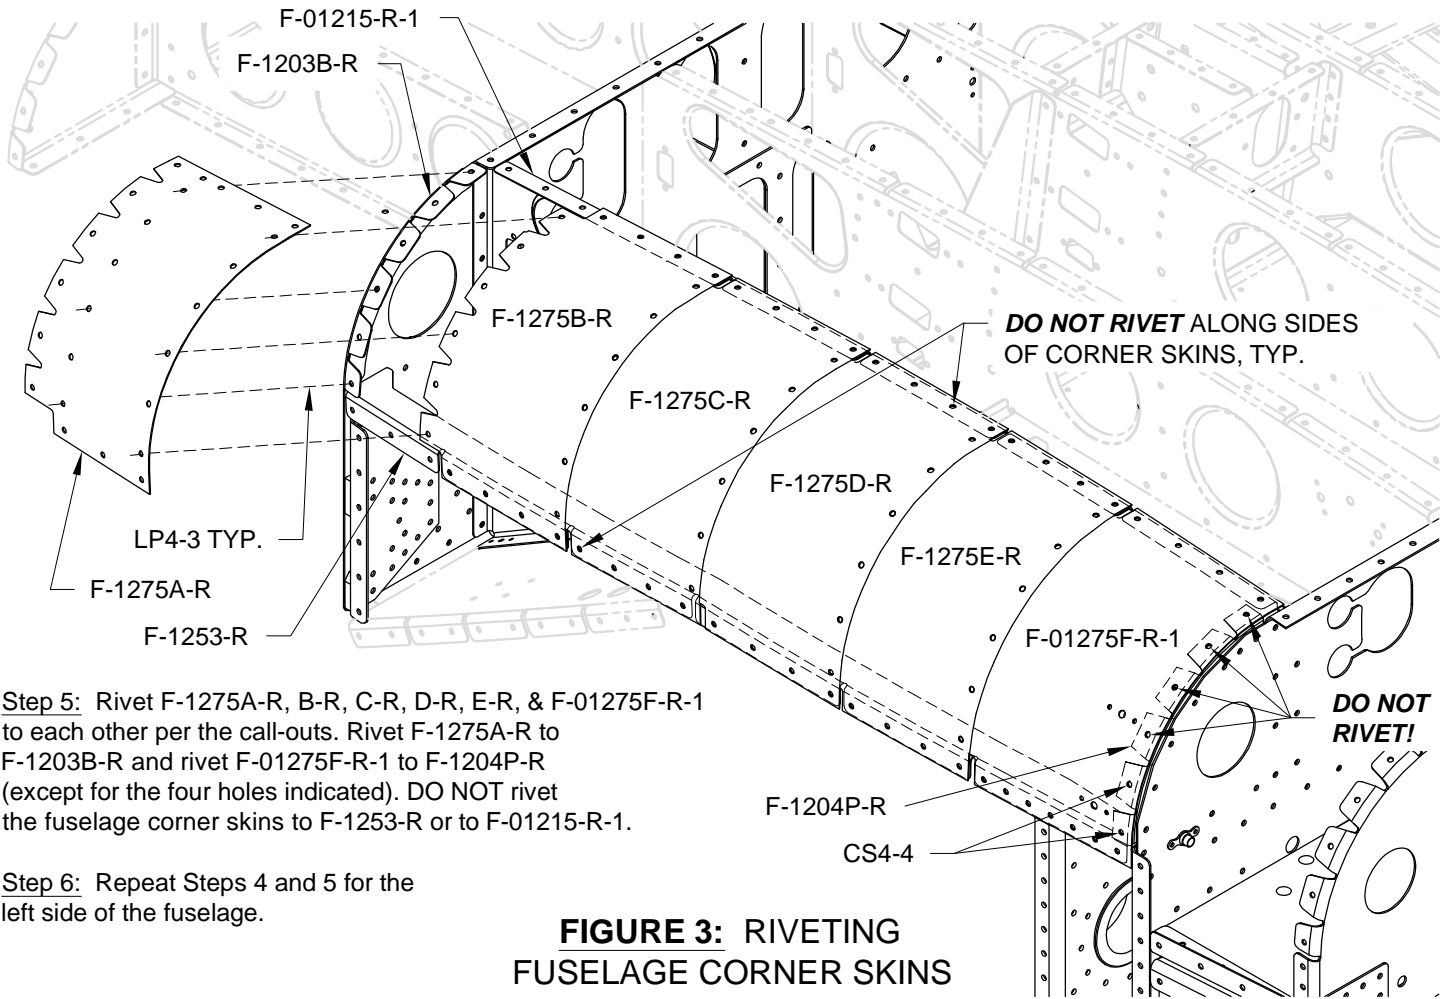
RIVETING FUSELAGE CORNER SKINS
